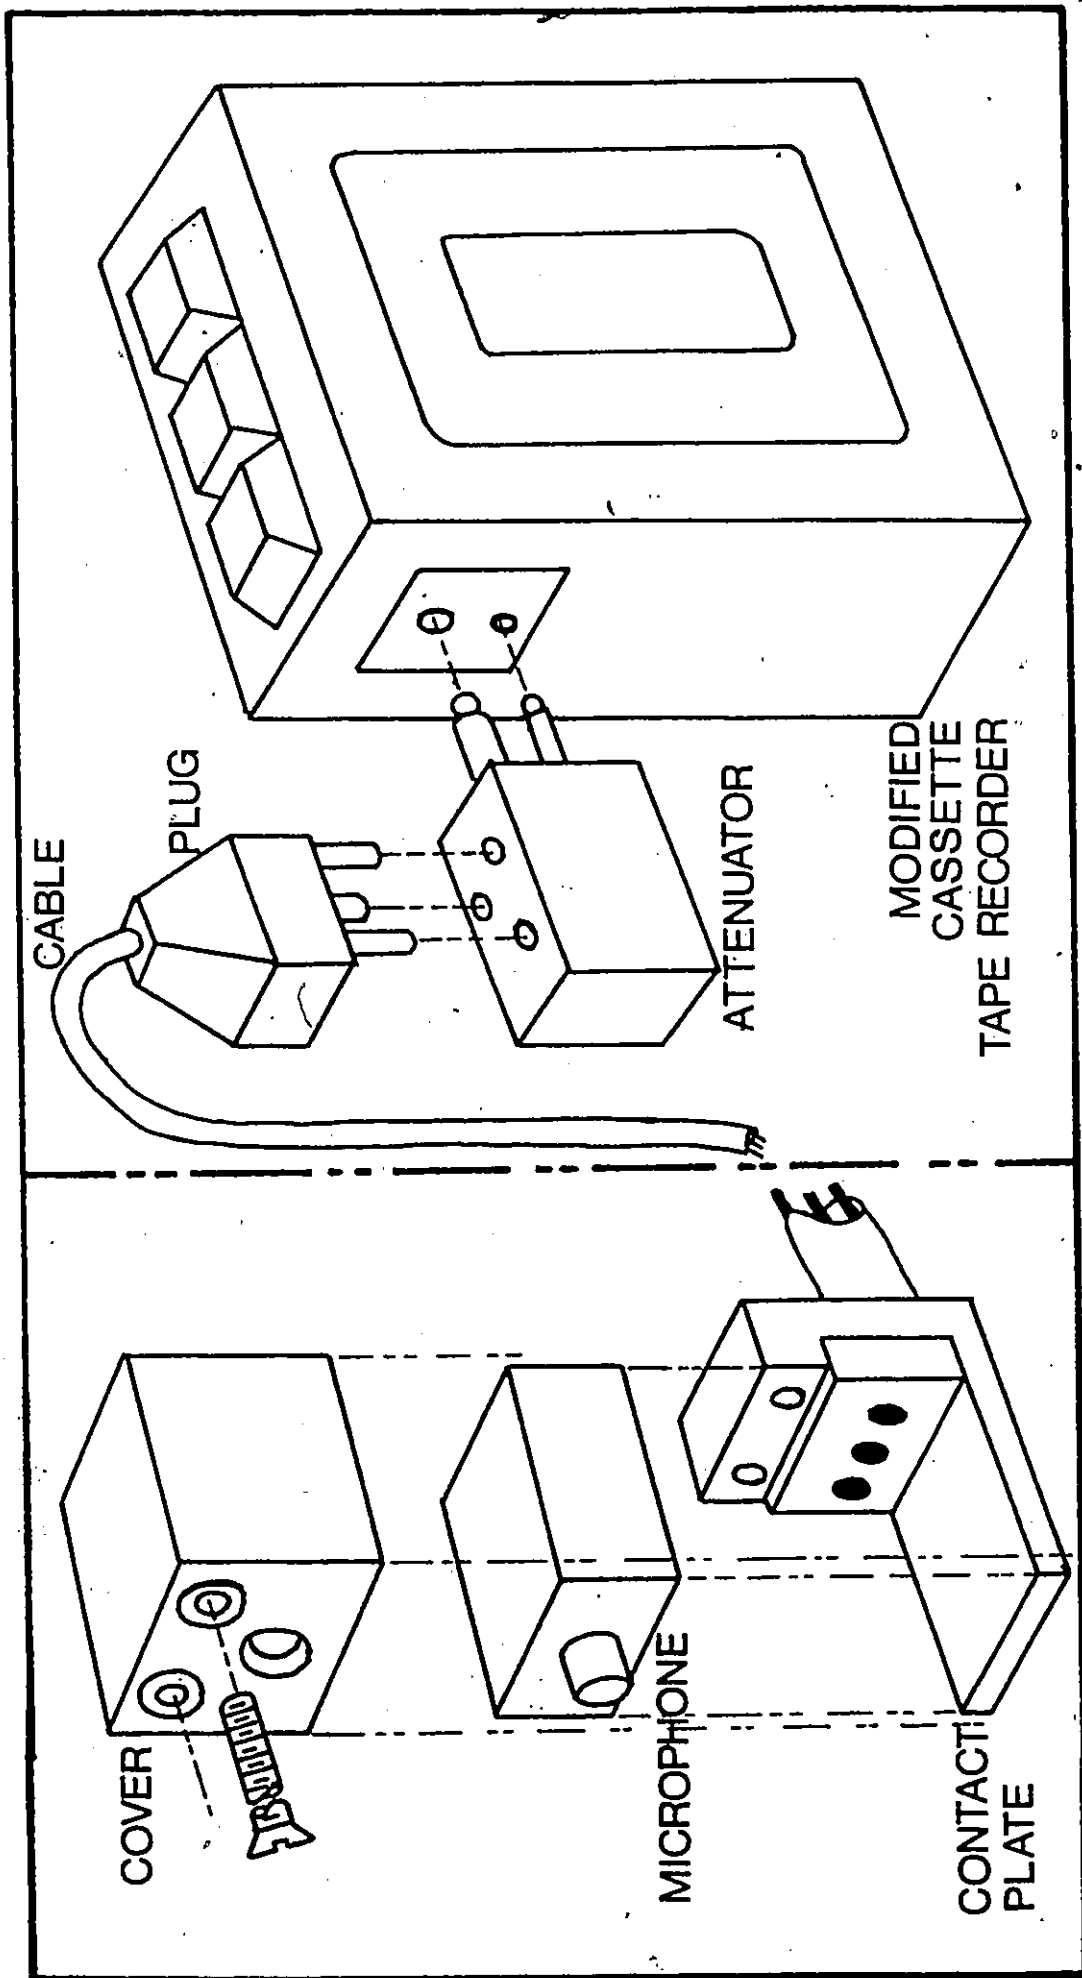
"EXPLODED" VIEW OF EAR BUG
